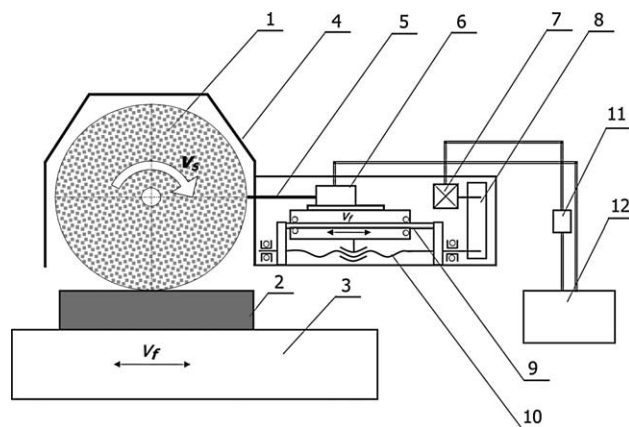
The scheme of measuring device for evaluation of superhard wheel cutting ability: 1-CBN wheel, 2-workpiece, 3-grinder's table, 4-fast headstock, 5-tester (thermocouple), 6-force sensor, 7-stepper motor, 8-belt transmission, 9-saddle, 10-screw-rolling transmission, 11-stepper motor controller, 12-computer,  $v_s$ -grinding speed,  $v_f$ -workpiece speed.
